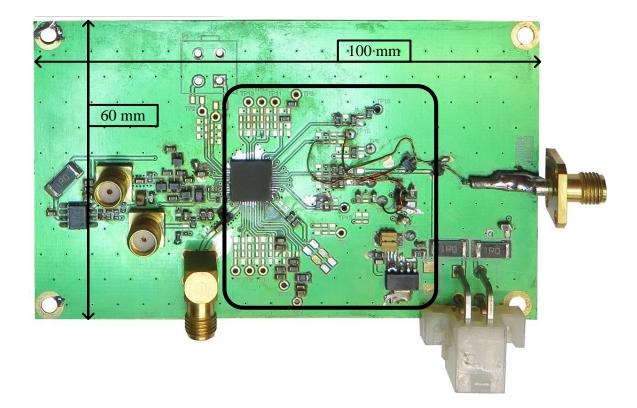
Photograph with dimensions of the PCB used to test the prototype IC.
